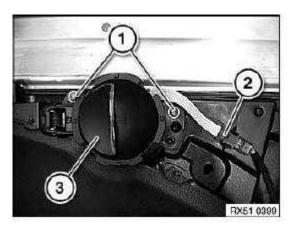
Identifying Plug Connection And Door Opener Courtesy of BMW OF NORTH AMERICA, INC.
